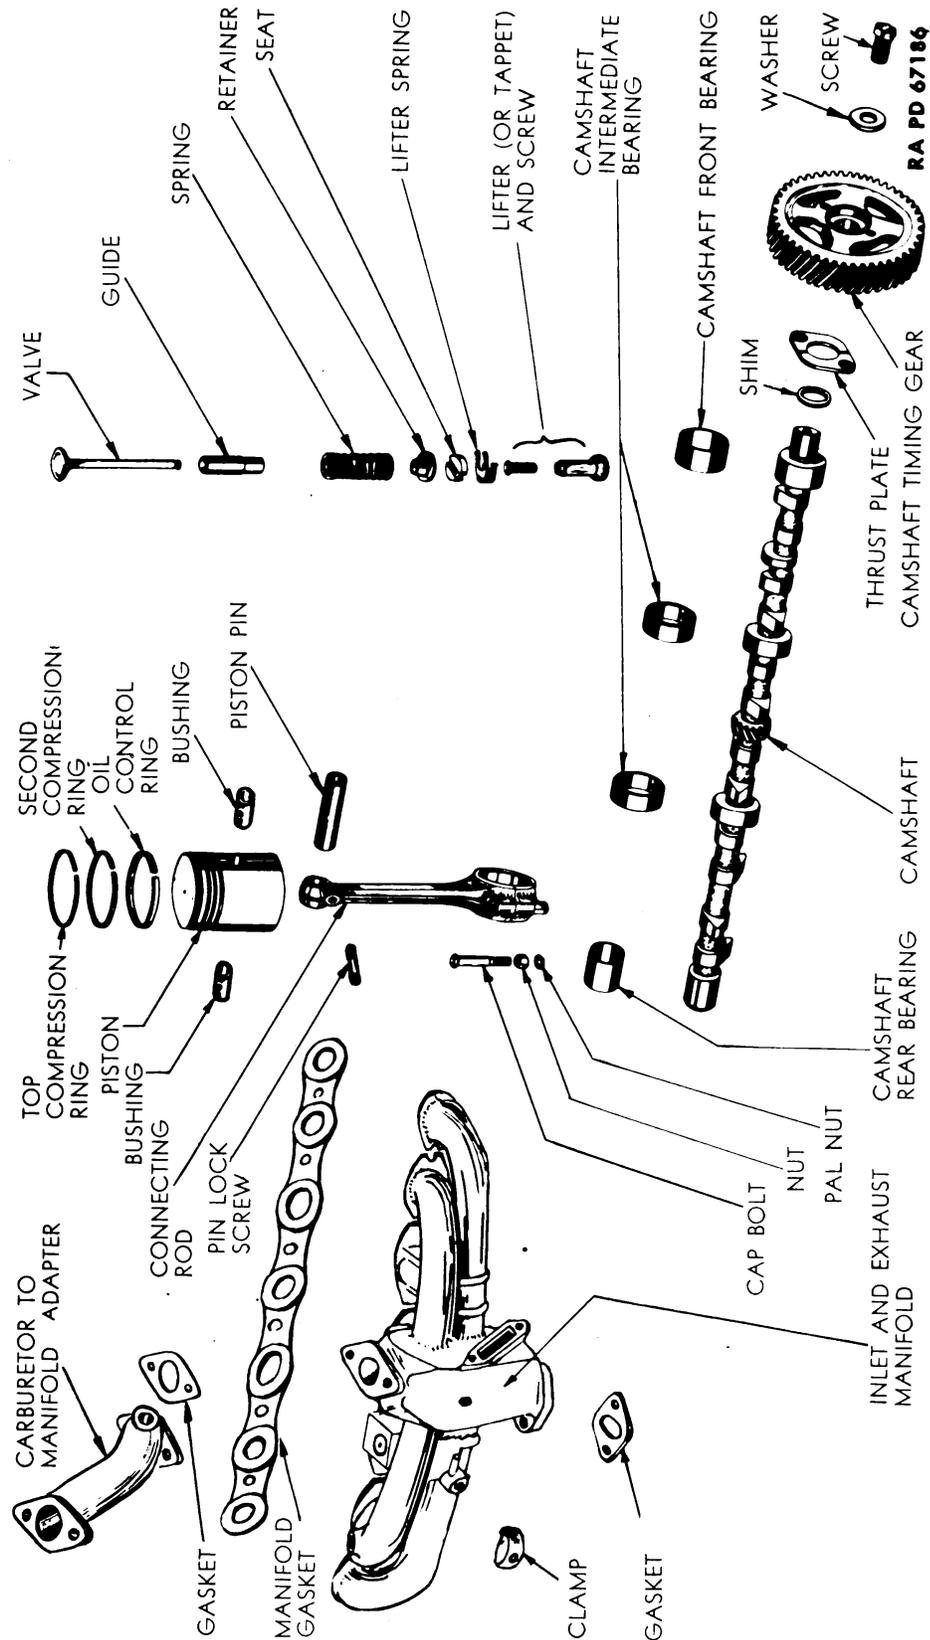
Manifold, Camshaft and Gear, Piston and Connecting Rod, and Valve Mechanism Parts
